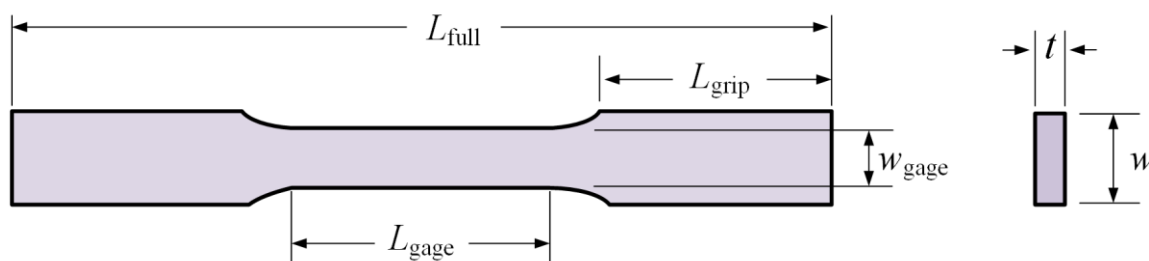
Dimensions of the dog-bone-shaped specimen used for the tensile tests.
